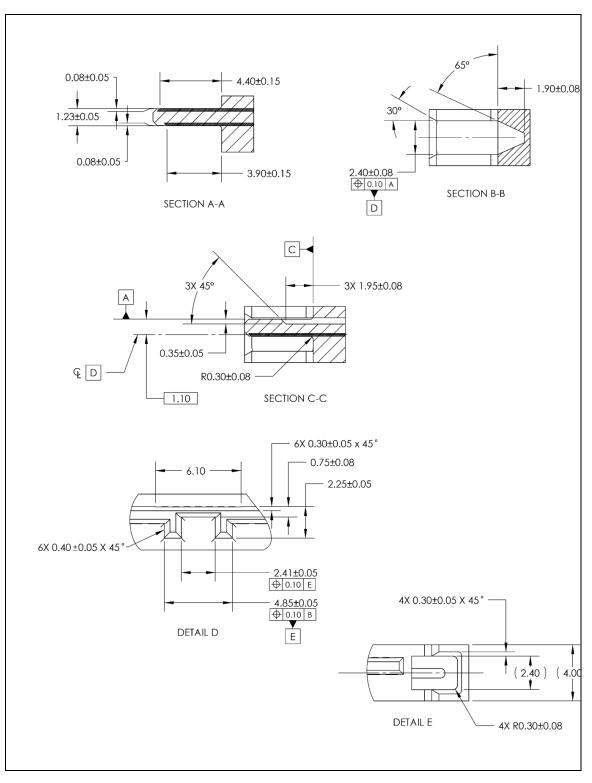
SATA Express device plug connector drawing (part 2 of 2)
